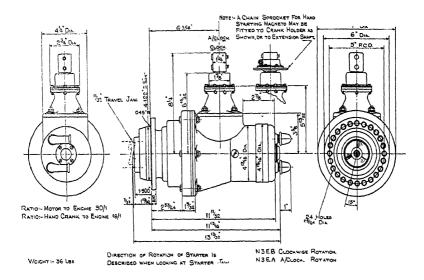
METHOD OF INSTALLING DIRECT CRANKING STARTER.
